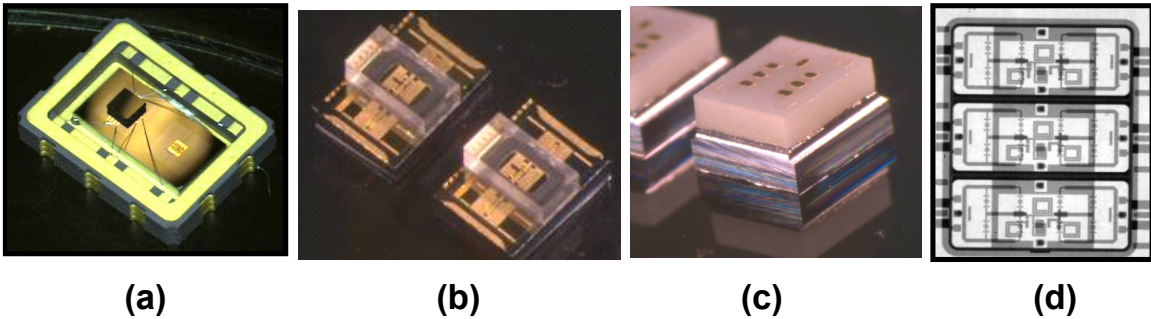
(a) Ceramic cavity package (b) Switches packaged by wafer-level bonding of a glass cap wafer using a glass frit seal (c) Switches packaged by wafer-level bonding of a ceramic cap wafer using a AuSn solder seal (d) X-ray of a switch module packaged by wafer-level bonding of a silicon cap using a gold thermocompression seal.
